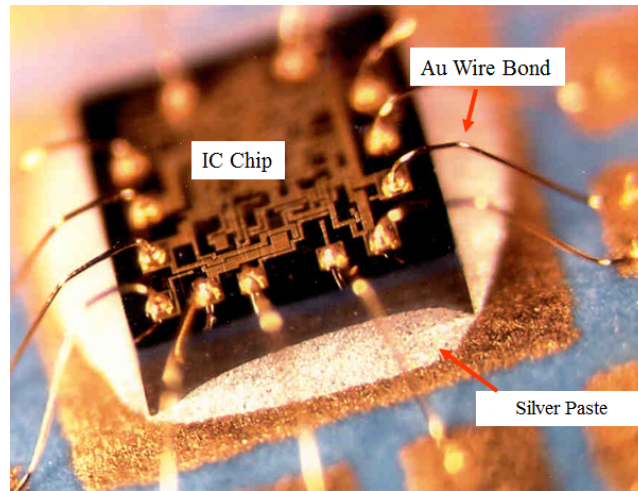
IC Chip fixed in a PCB using silver paste.
